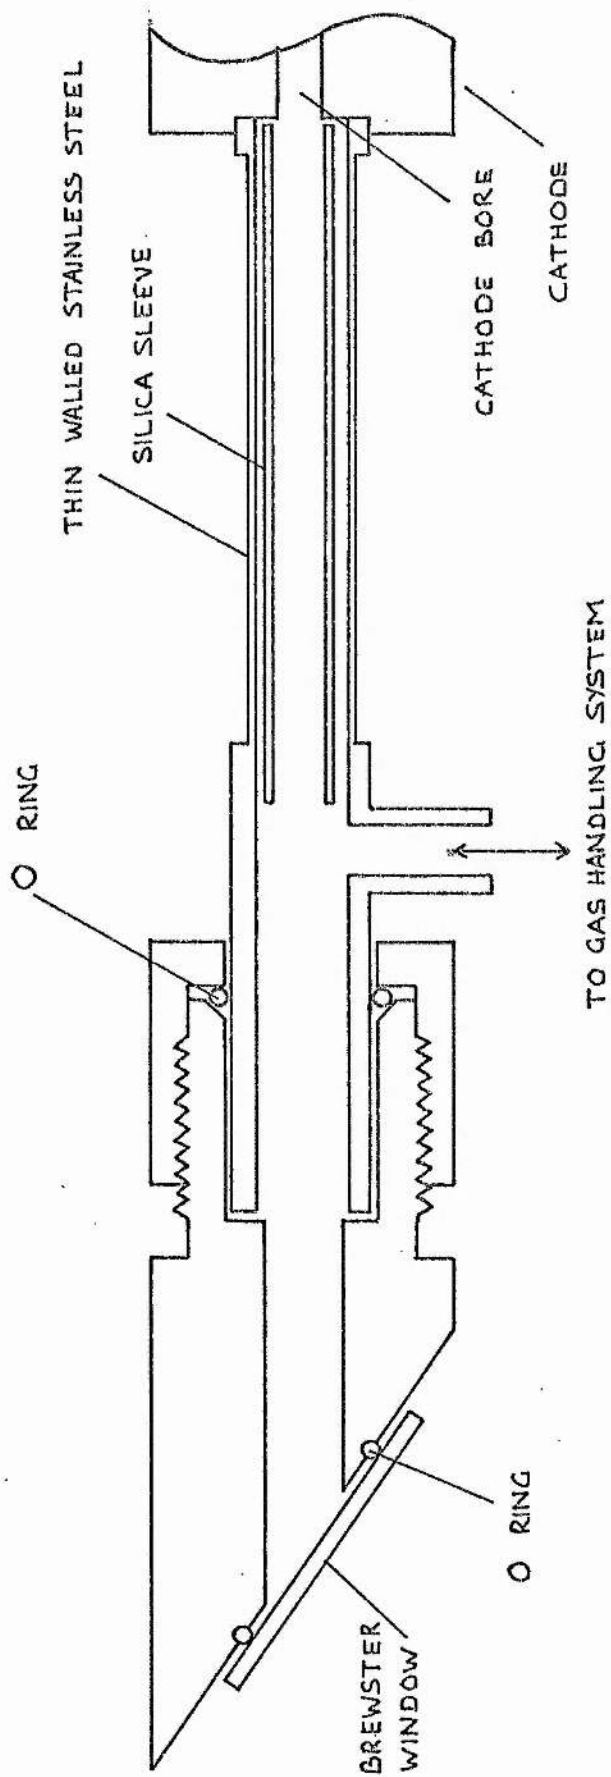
BREWSTER WINDOW ASSEMBLY FOR TUBE No. 6
